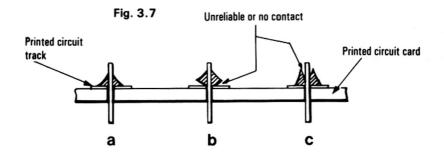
(b) and (c) show exaggerated profiles of unsuccessful joints. These can be caused by inadequate heating of one part, or the other, of the joint, due to the iron being too cool, or not having been in direct contact with both parts; or to the process being performed too quickly. An alternative cause might be contamination of the unsoldered surface.
